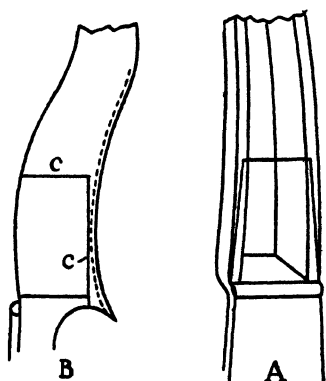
Pegbox Cheeks Marked Out for Grafting (A, Front View; B, Side View).
